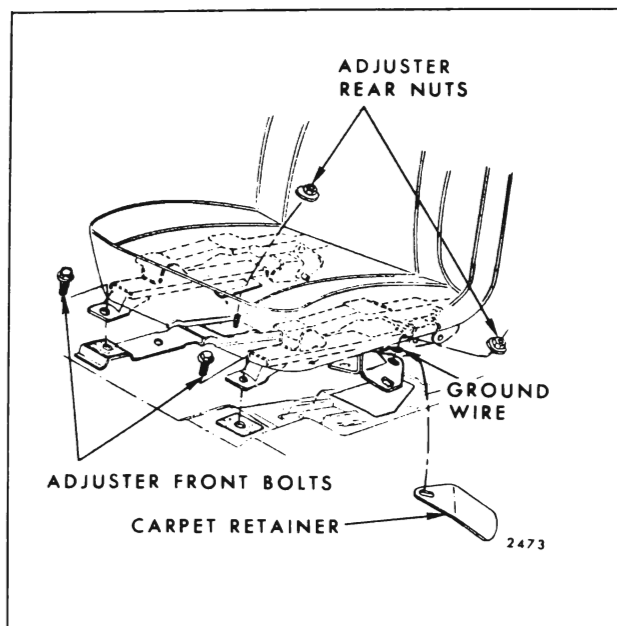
Bucket Seat Floor Pan Attachment - "A, F, X & Z" Styles
